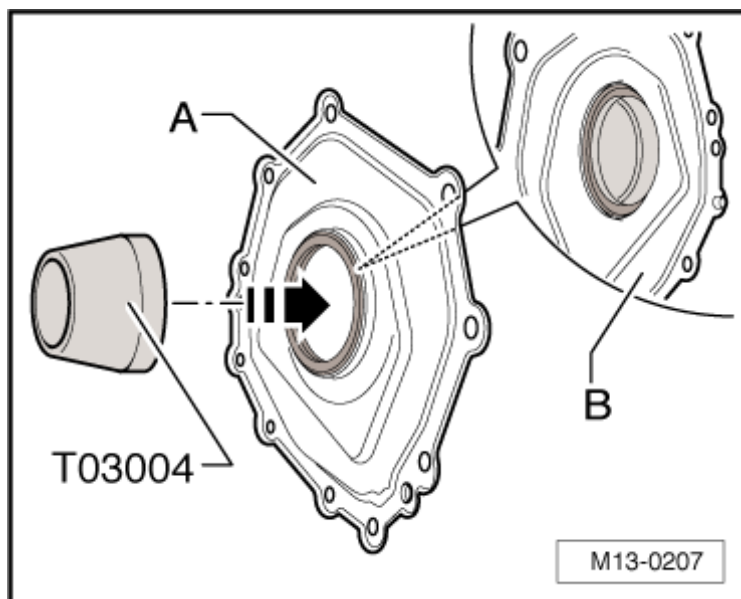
Sliding Assembly Sleeve T03004 Into Sealing Ring
